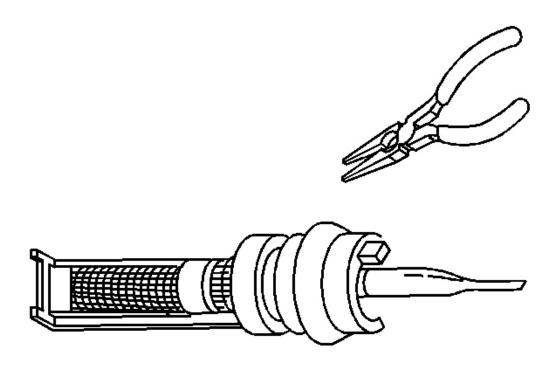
Accessing End Of Orifice Tube Courtesy of GENERAL MOTORS CORP.
